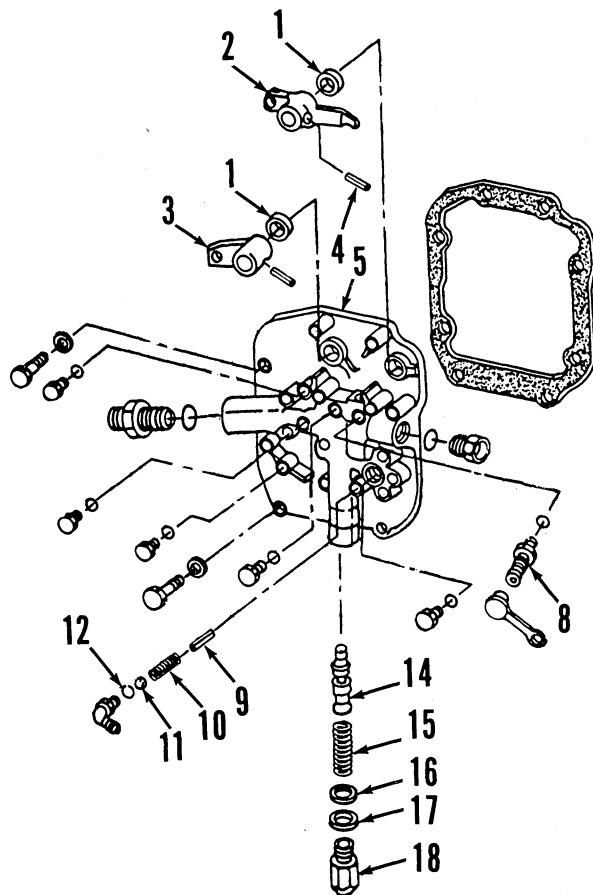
Exploded view of pressure regulating valve outer housing assembly. Refer to Fig. 103A for inner valve housing components.
